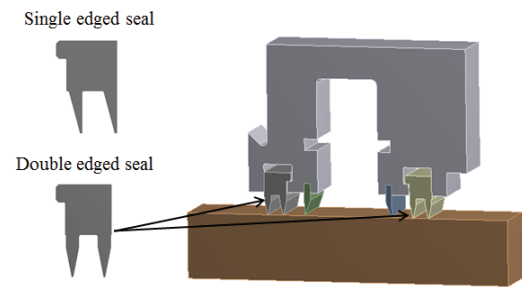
Shapes of the single edged seal and double edged hi-performance seal
